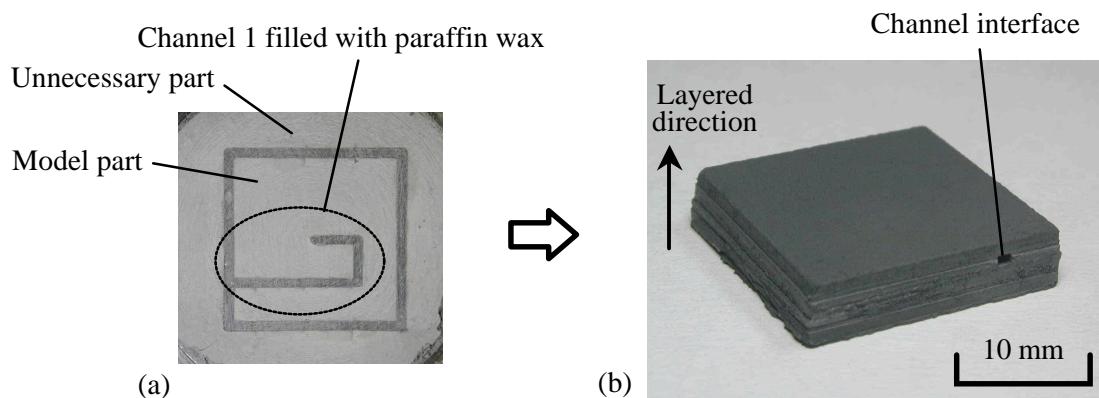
WC-9wt%Co green model with inside channels fabricated using the LCM process. (a) Top view of the second layer. (b) Complete view of the final green model.
